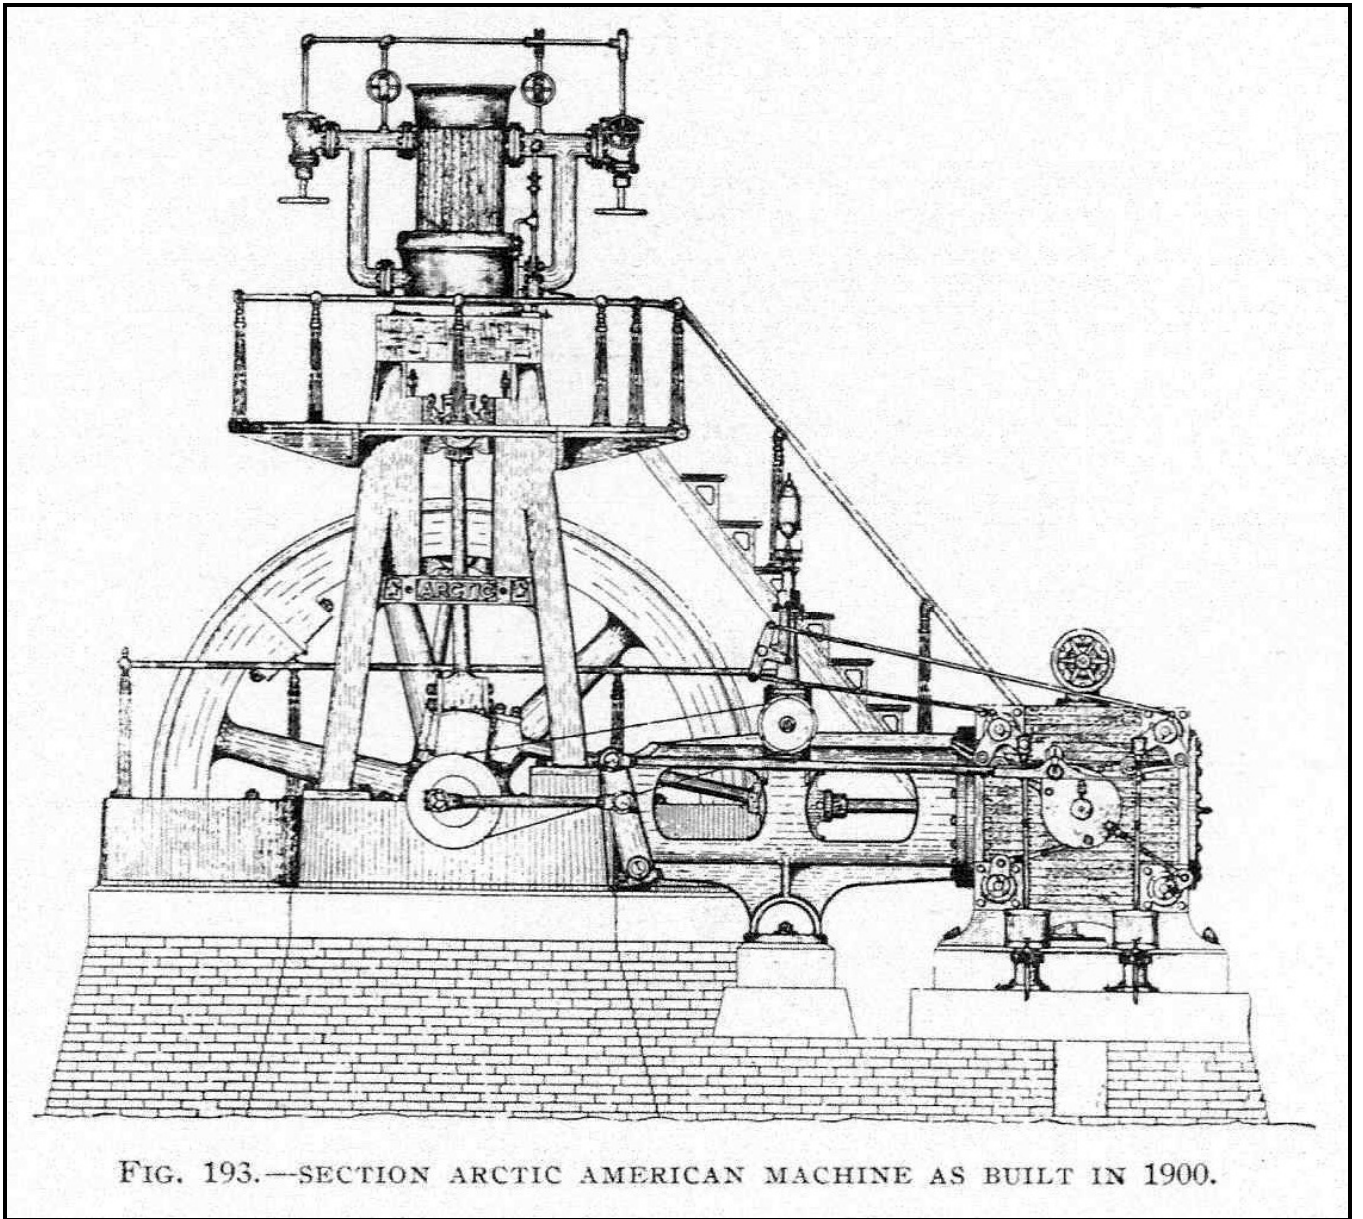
SECTION ARCTIC AMERICAN MACHINE AS BUILT IN 1900.
